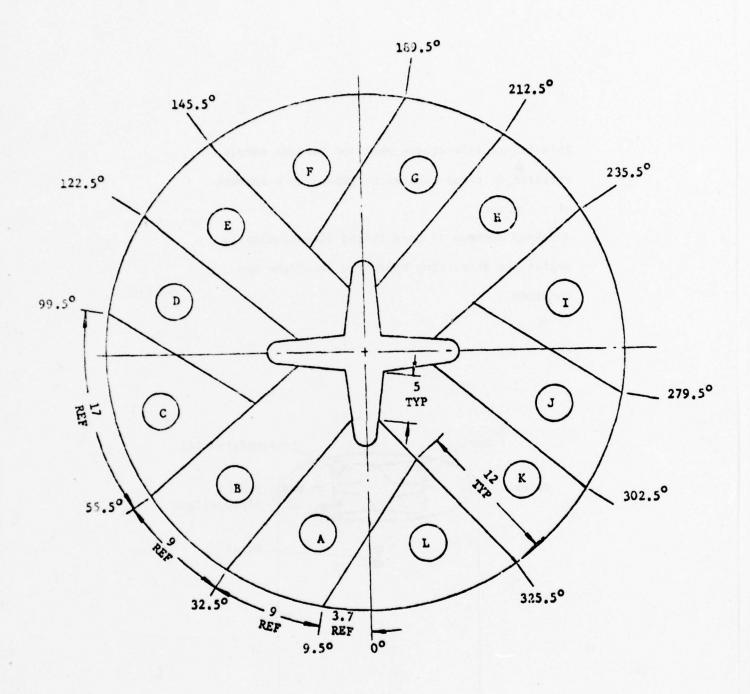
Section 3 and 4 Segment Layout and Letter Identification
